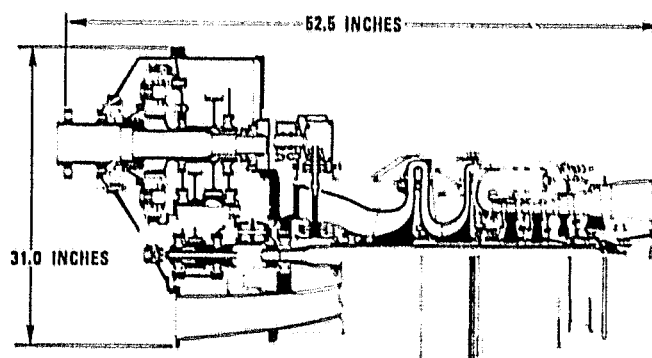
Detroit diesel Allison engine and gearbox schematic Mach 0.70 aircraft (50 passenger).
